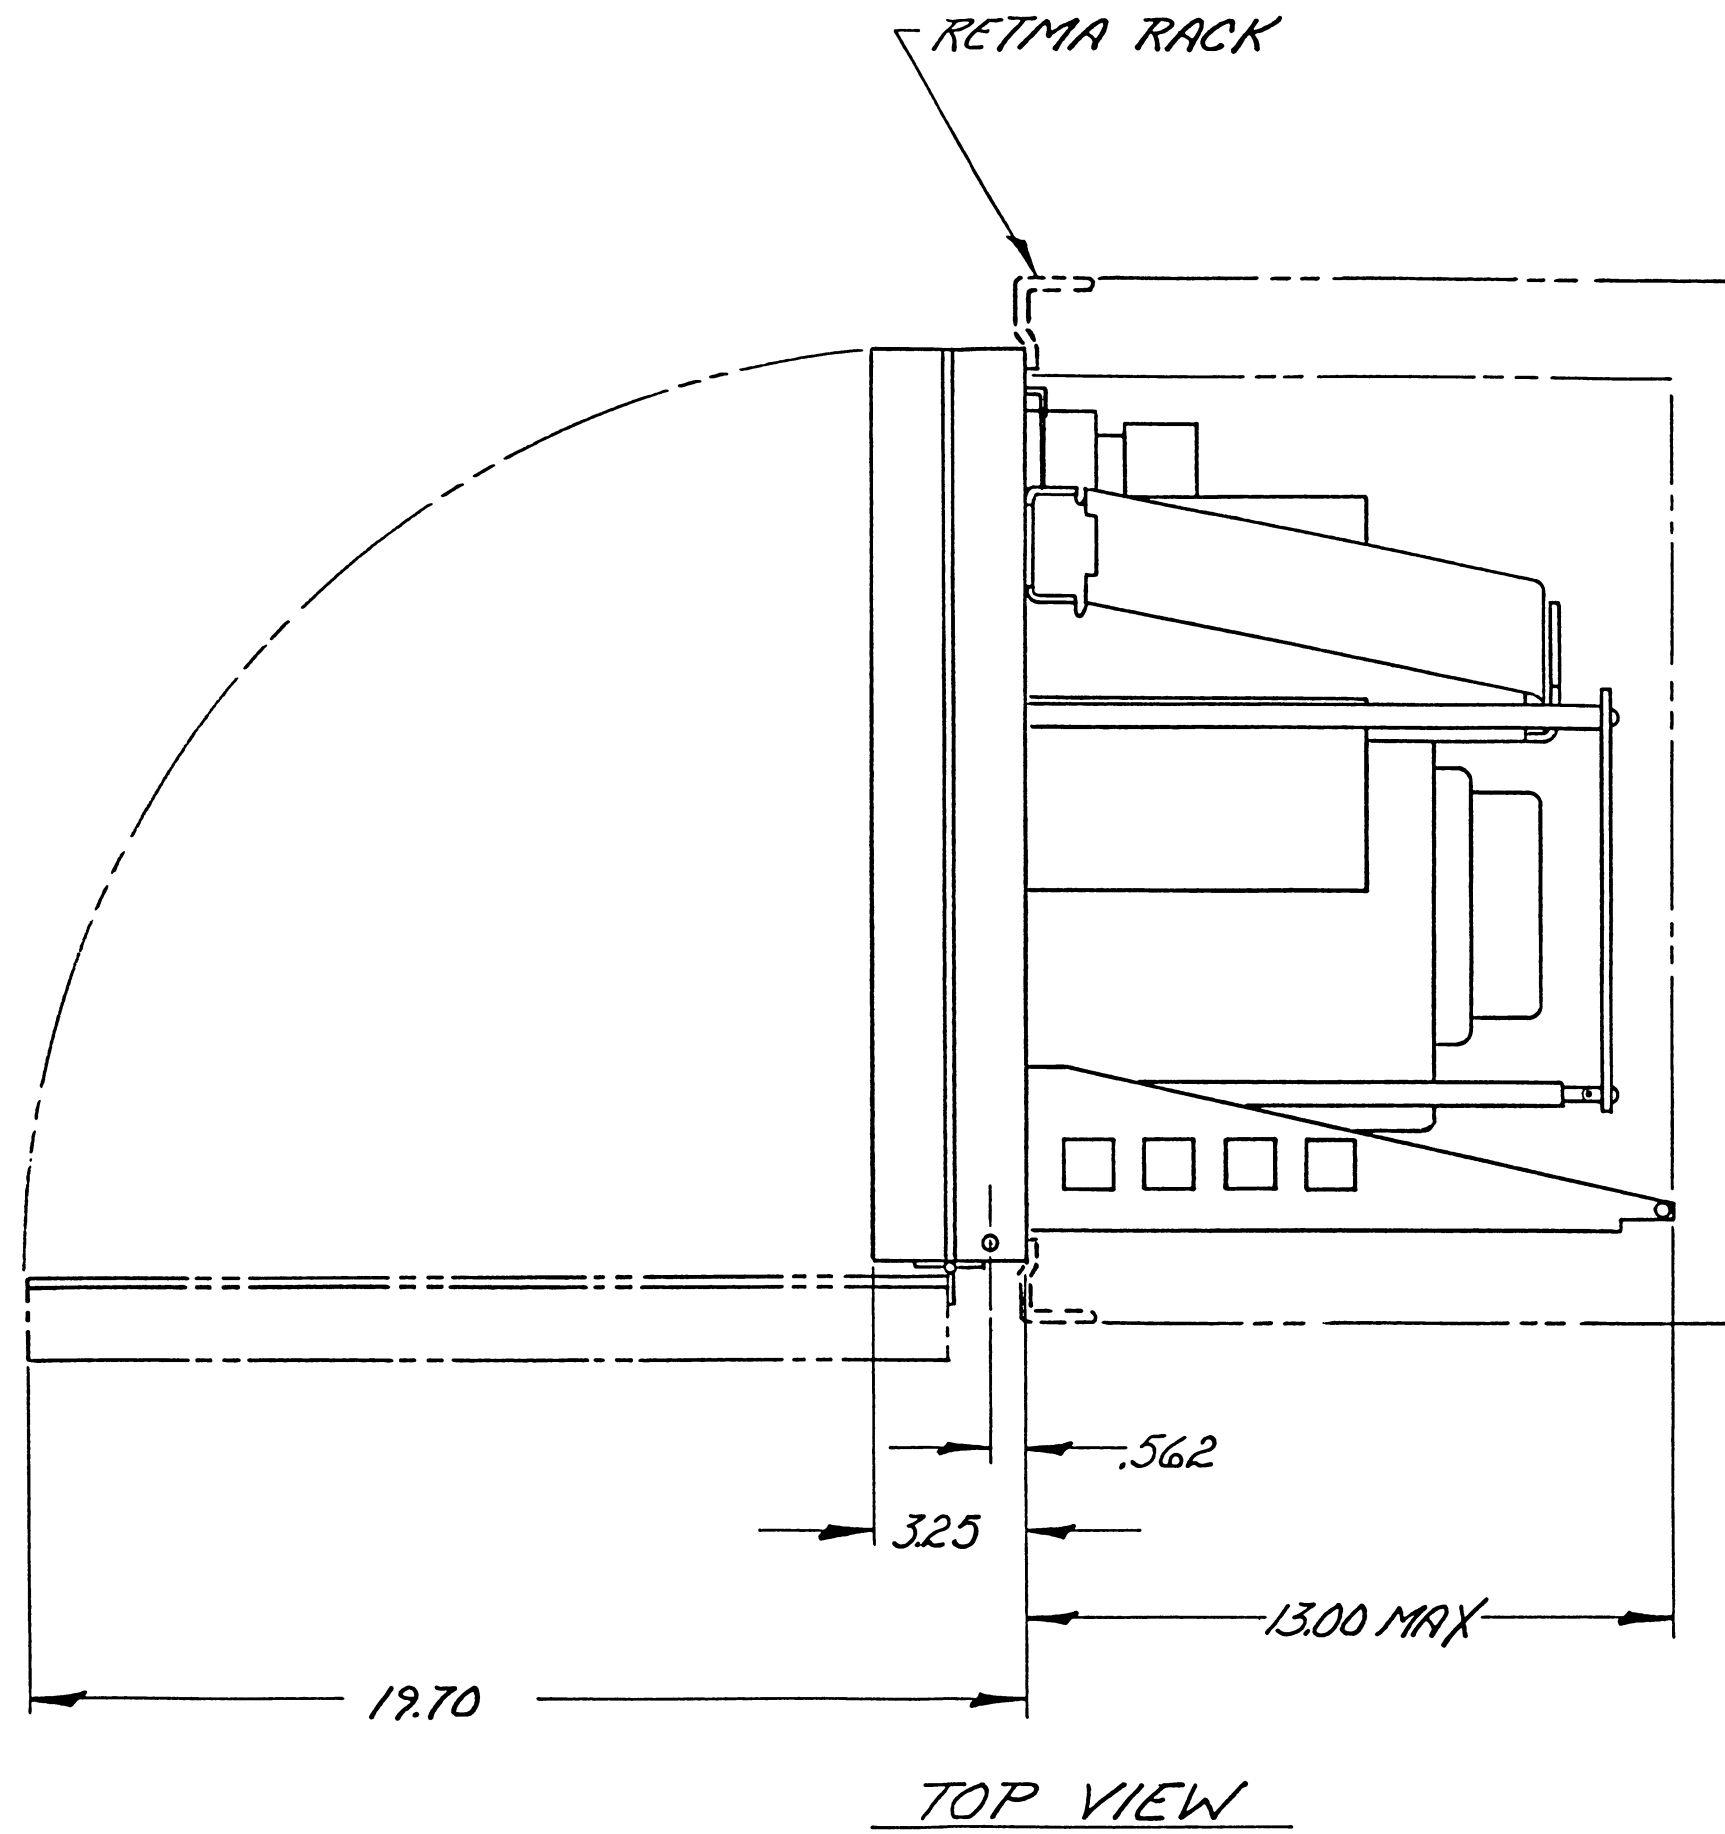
Model 900X Outline Dimensions (Sheet 2)
